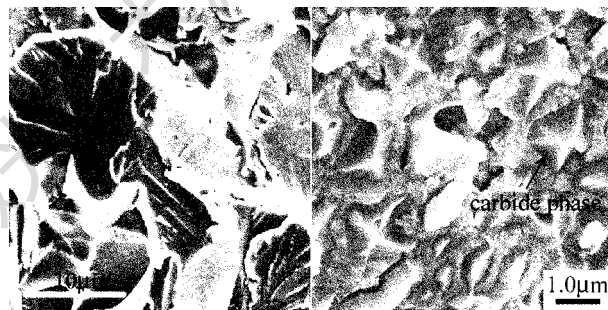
Fractograph of clad layer with powder mixtures of stellite-6 and 0.26WC without preheating
